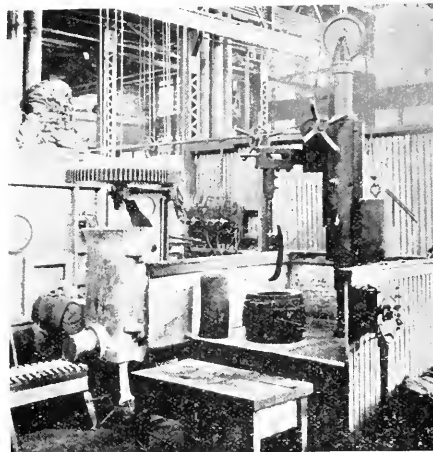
Pug Mill (on left), Jigger and Jolly (on right).
